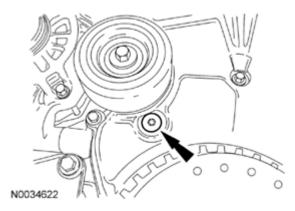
Locating Lower Front Cover Timing Hole Plug Courtesy of FORD MOTOR CO.
